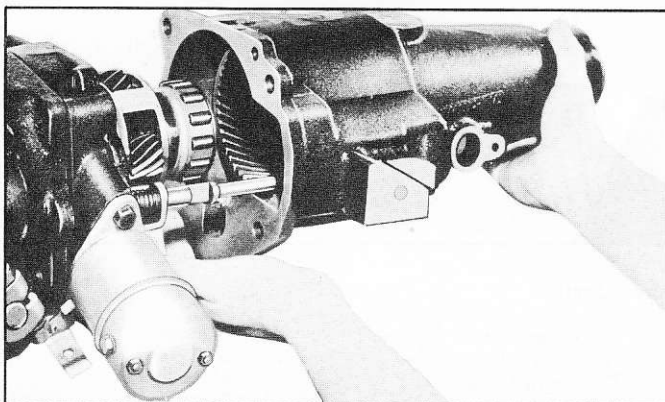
B—Removing Overdrive Housing and Shaft Assembly
